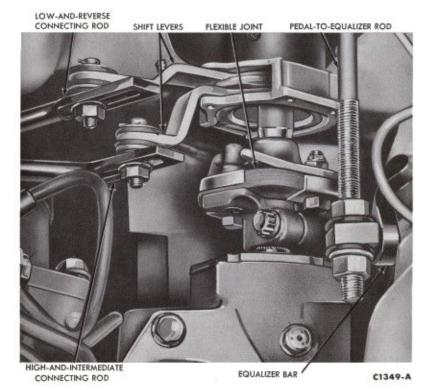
Clutch Pedal Travel Adjustment-Typical
